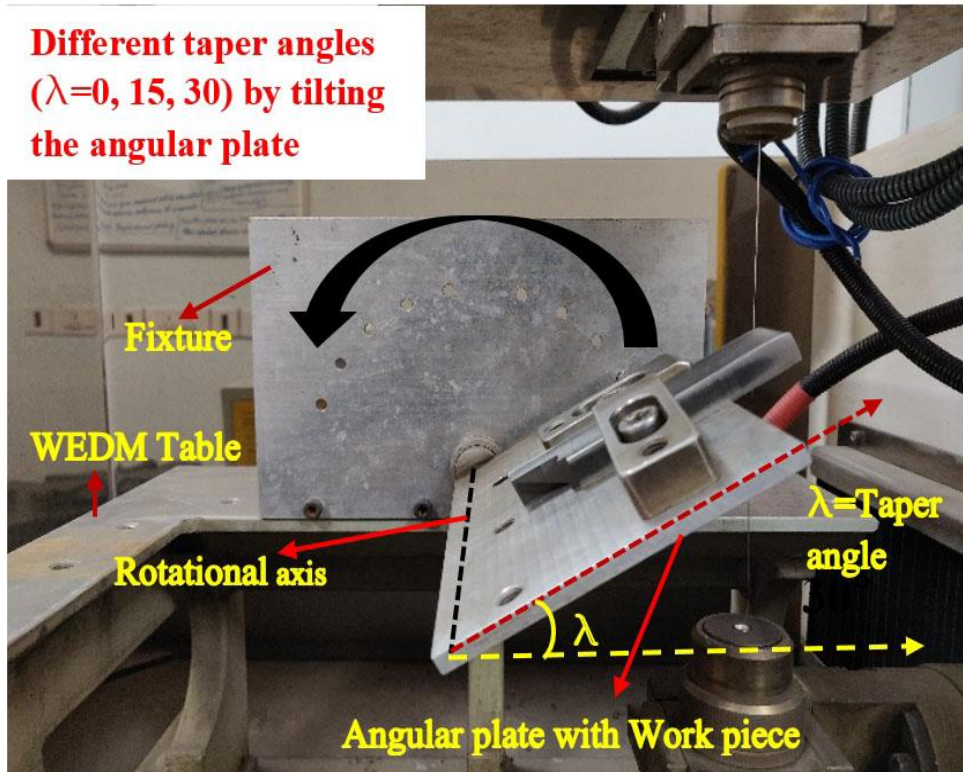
Slant type taper fixture fixed on WEDM with workpiece
